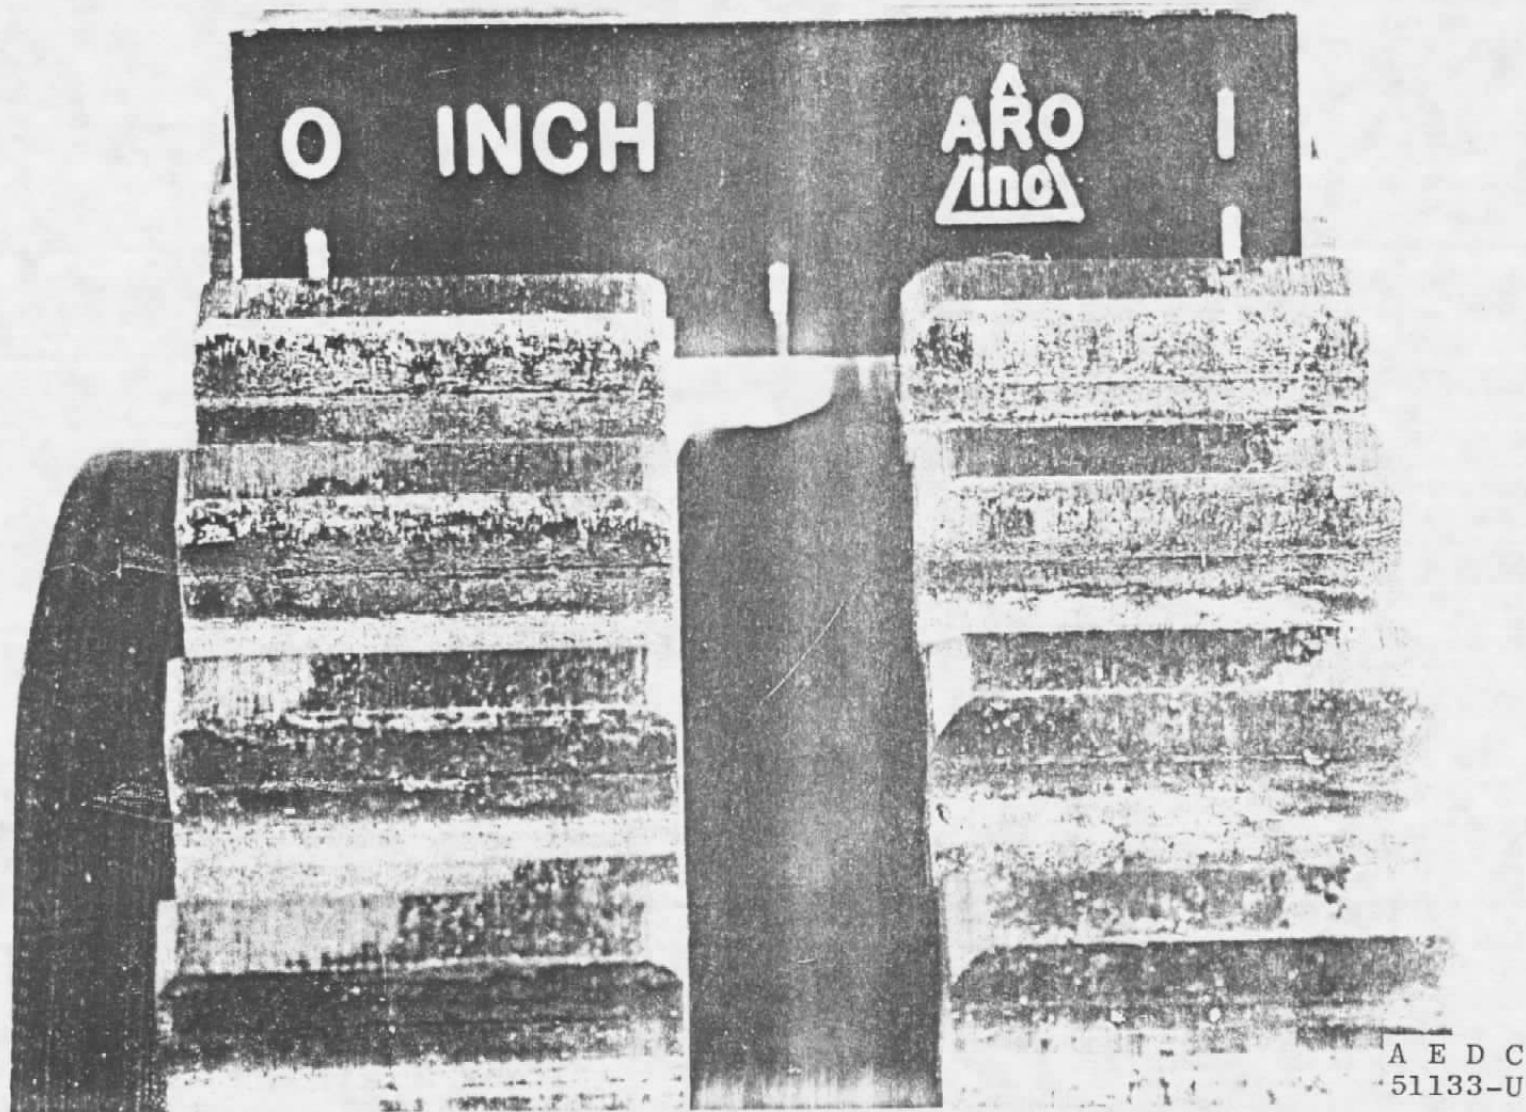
12-D.P. Nodular Iron Gears after 83 hr in Test 2
